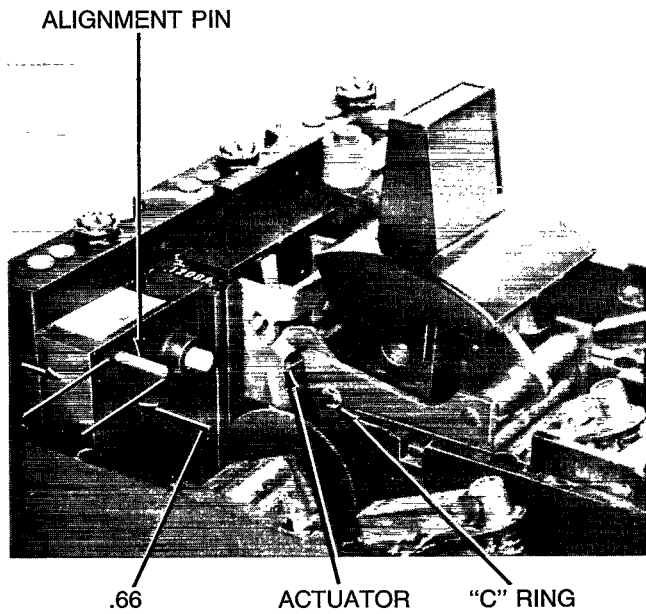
Actuator placement on the circuit breaker mechanism side frame and location of the alignment pin.
